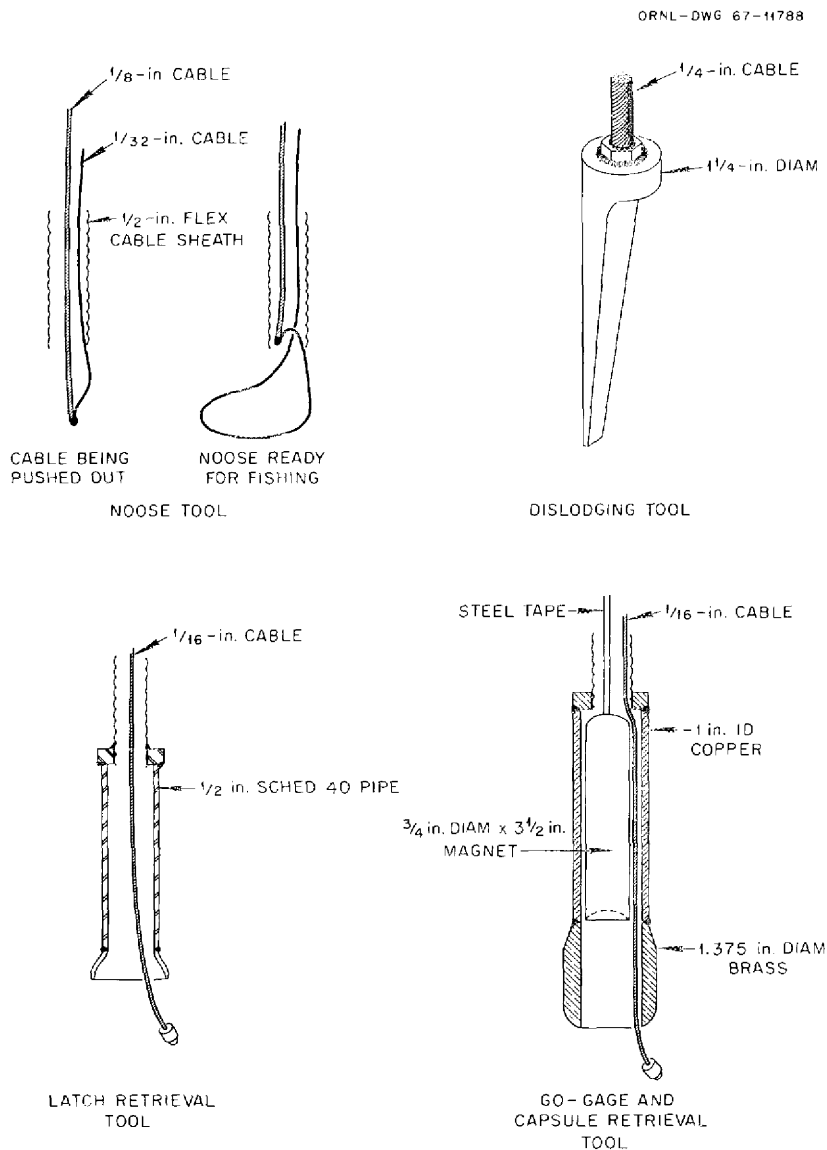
Tools Developed for Retrieval of Latch and Capsule from Sampler-Enricher.
